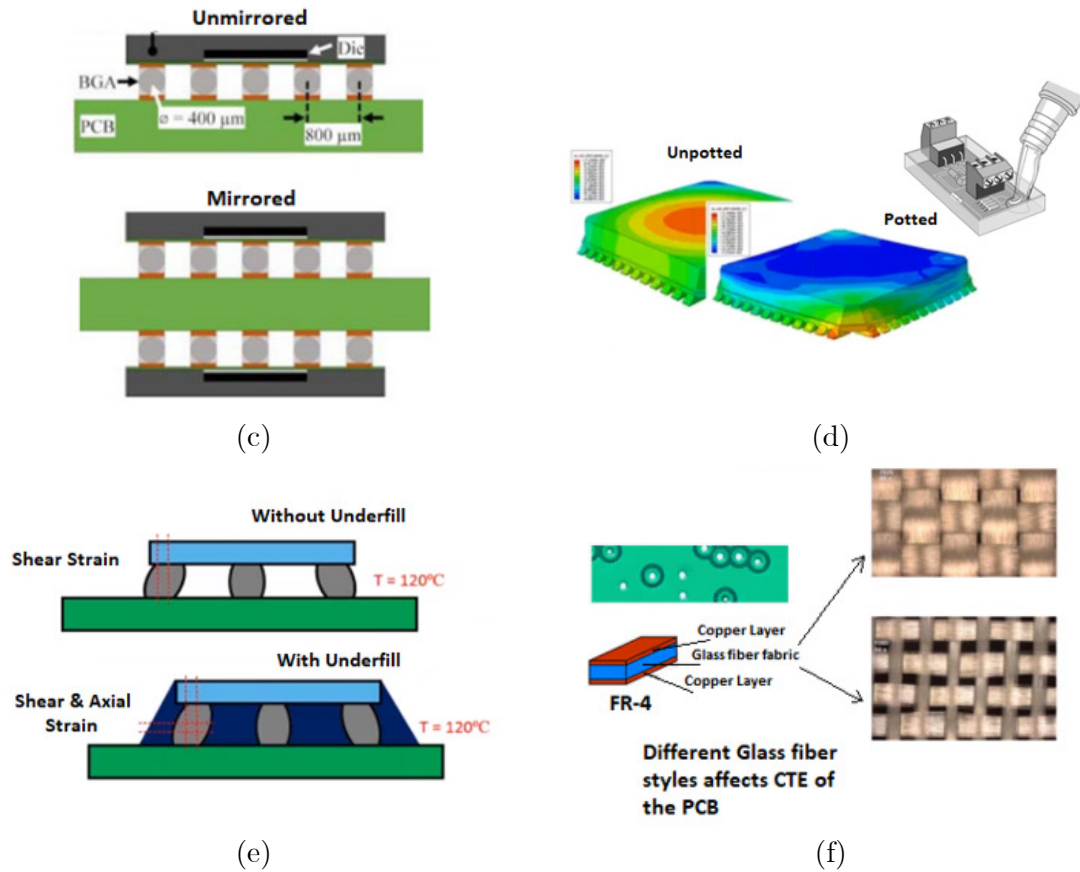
Causes on PCB Solder Joint Degradation [100, 101]
